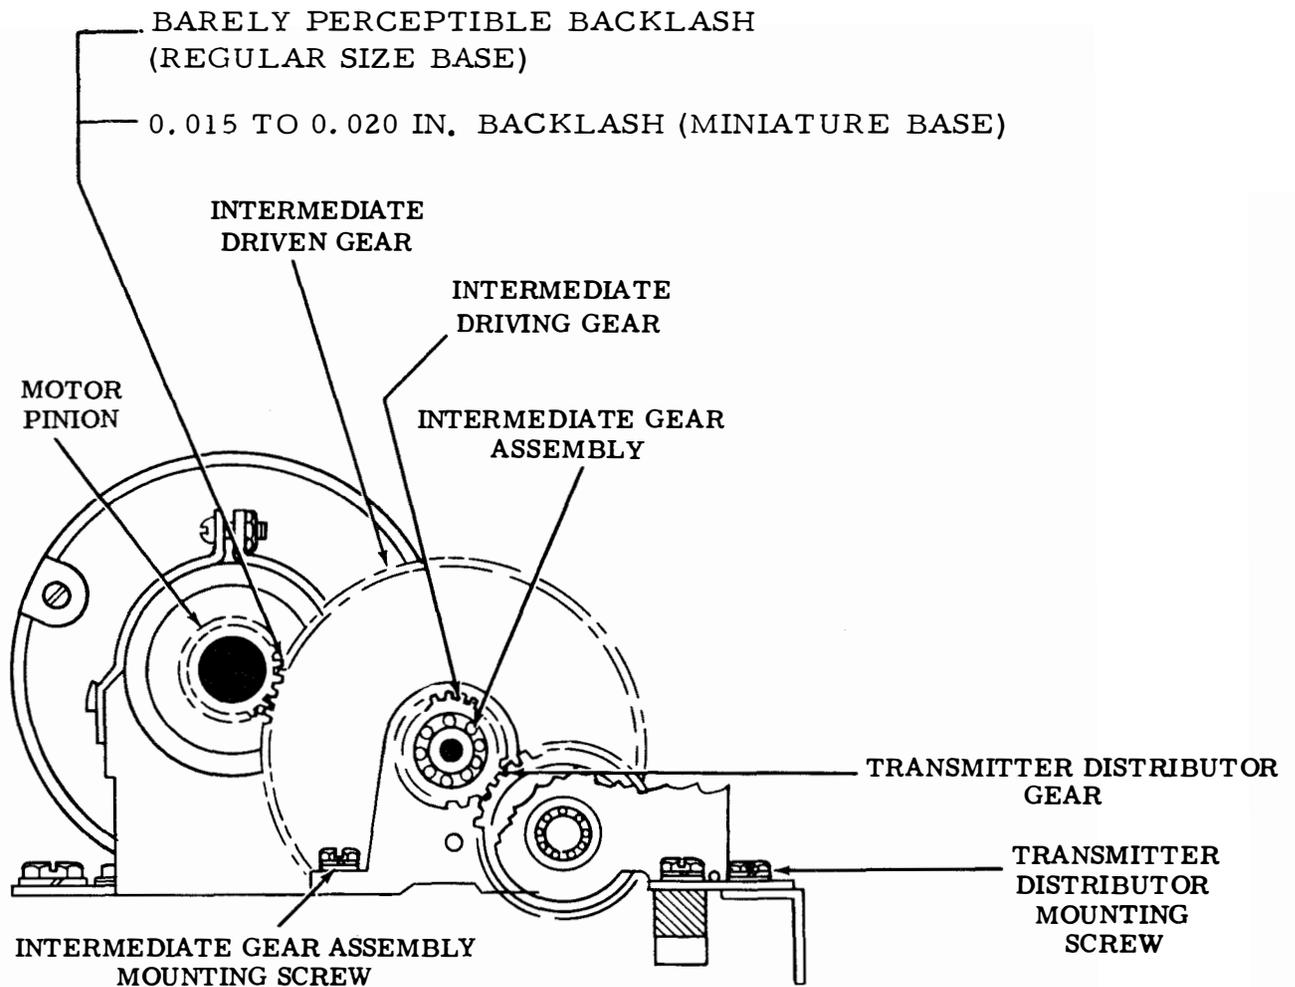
Transmitter Distributor Gear and Intermediate Shaft Assembly
